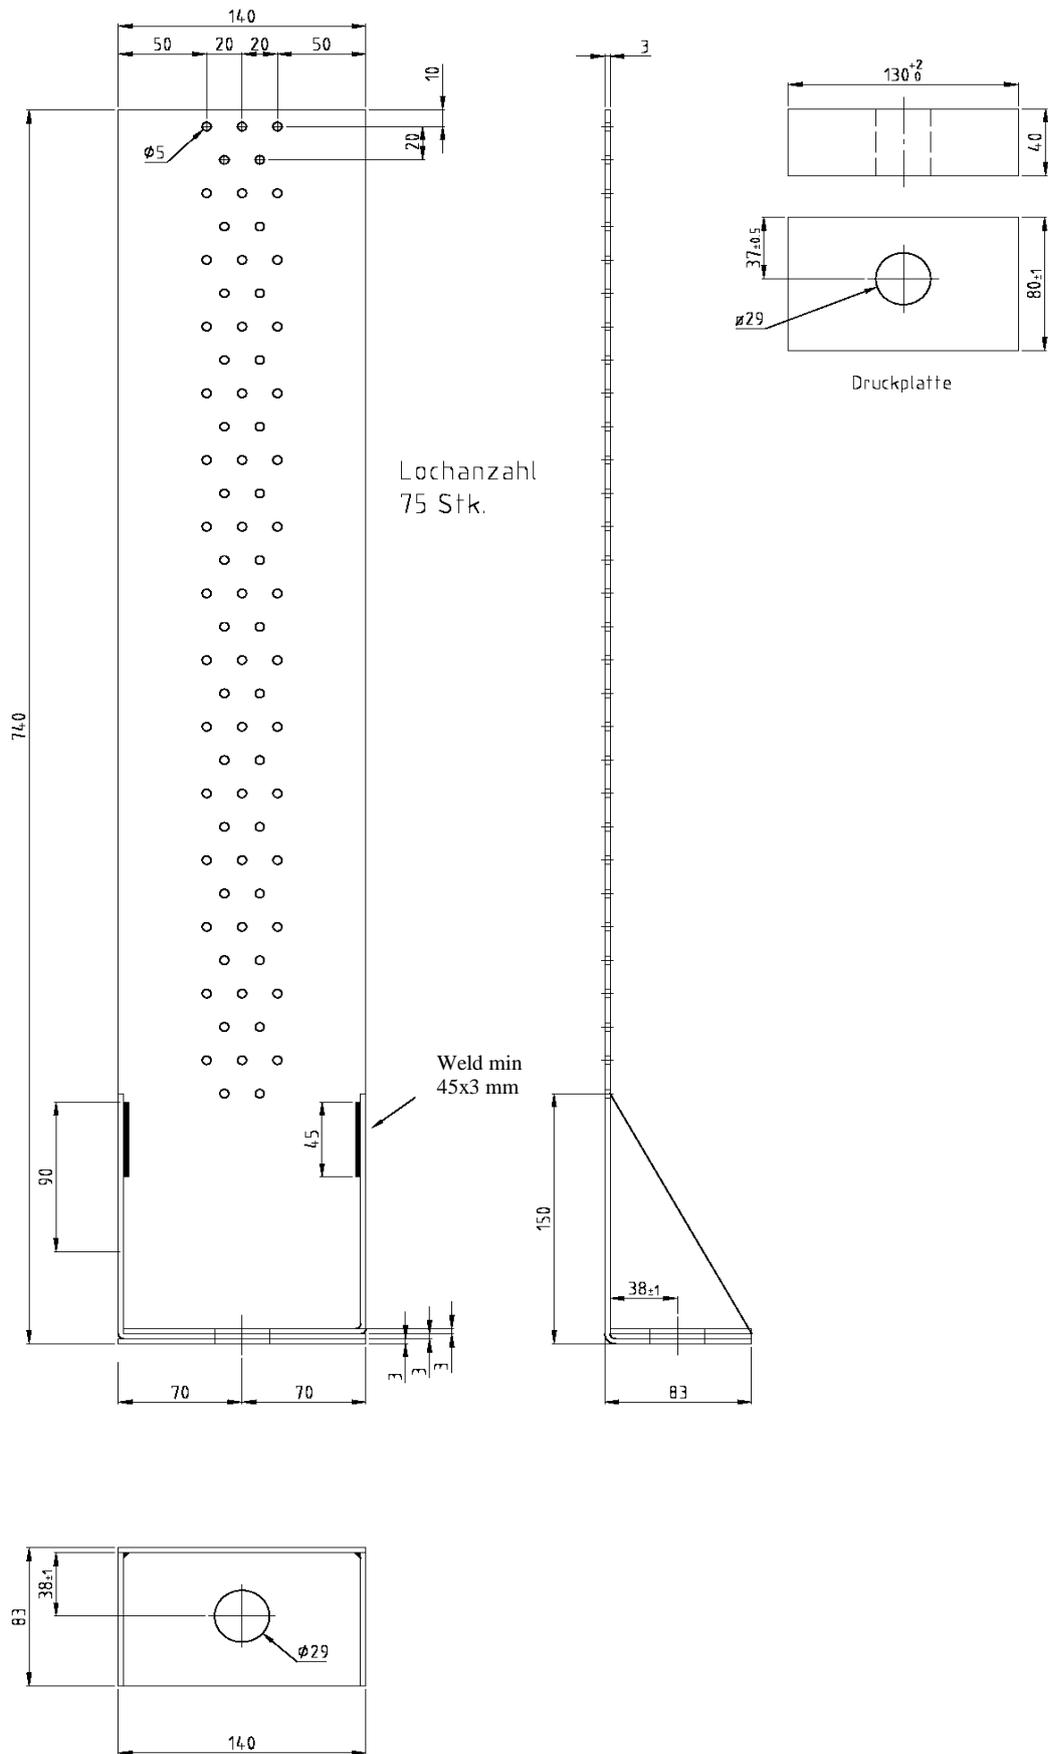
Dimensions of type GH HT36 140/740 (drawing with washer 80x130x40)
